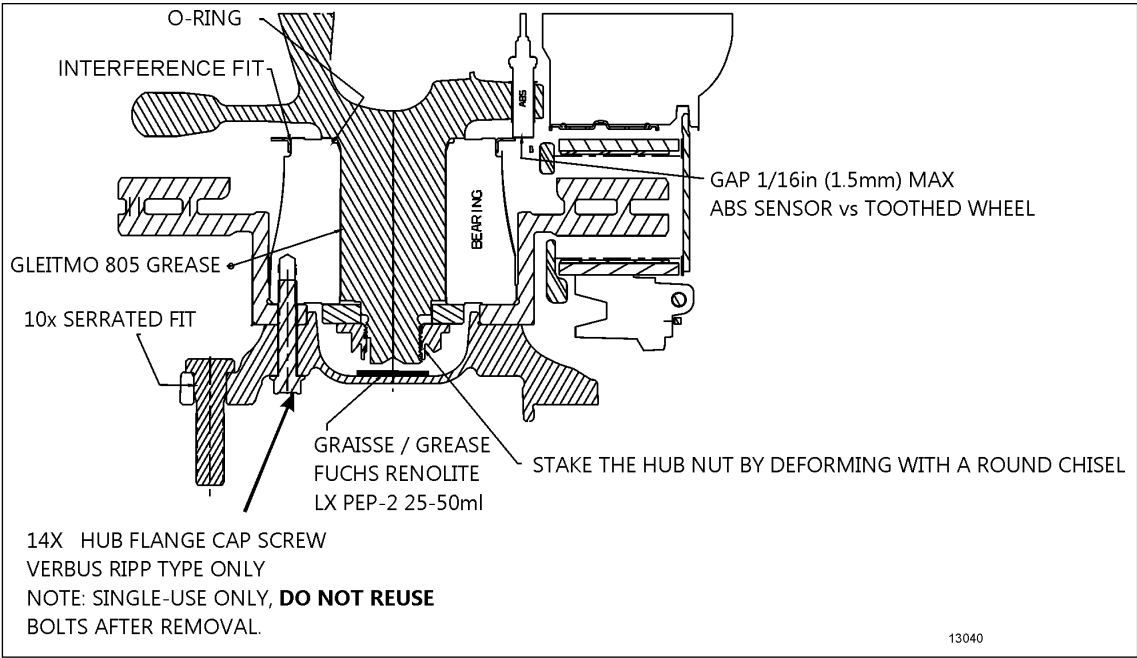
TAG AXLE UNITIZED BEARING & WHEEL HUB
